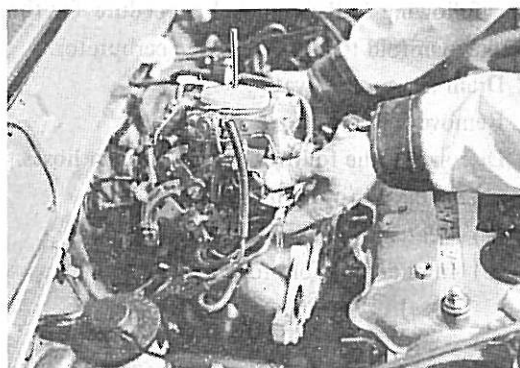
Removing Intake Manifold (Together with Carburetor)
